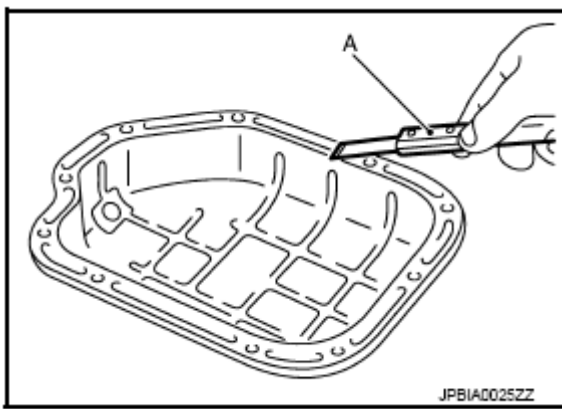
Removing Old Liquid Gasket From Lower Oil Pan Using Scraper
